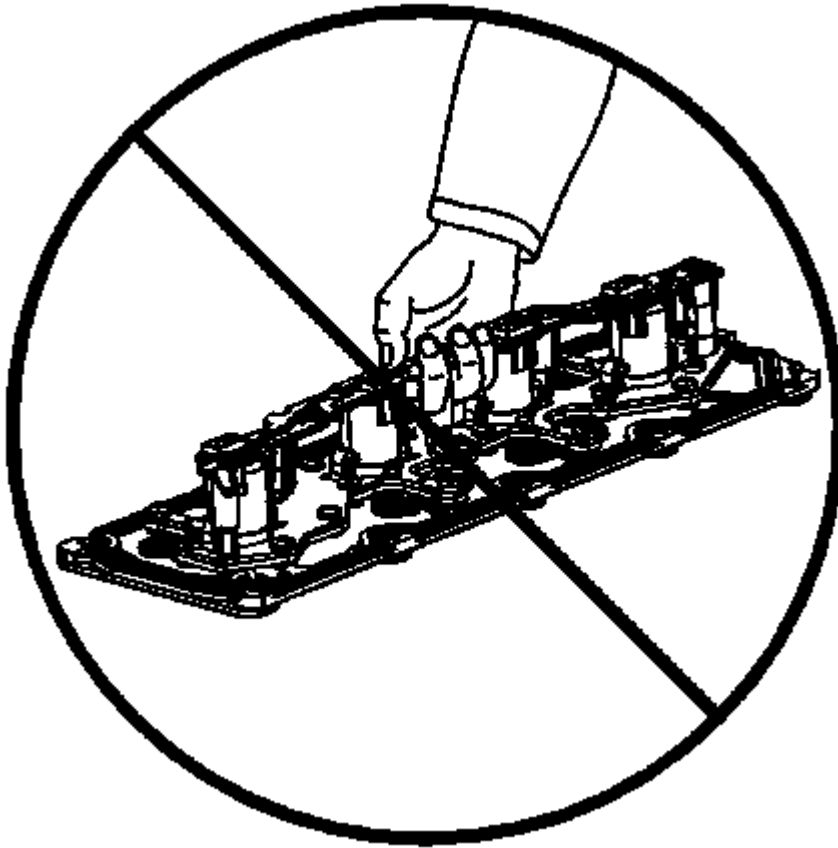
Valve Lifter Oil Manifold Handling Precaution
